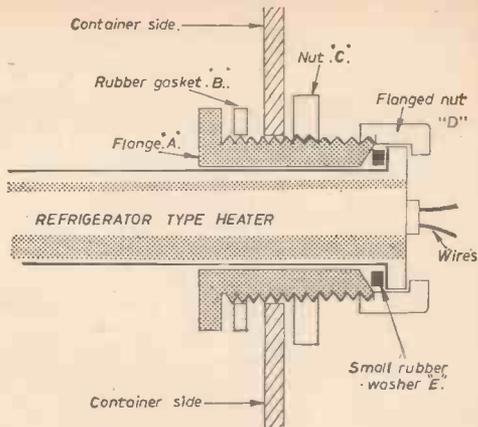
Surplus heater mounted in plumber's flange fitting.
